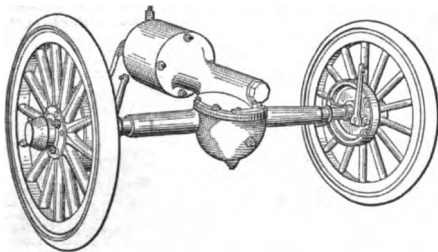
Rear axle assembly, spiral gear drive. (Commercial Truck Company.)
